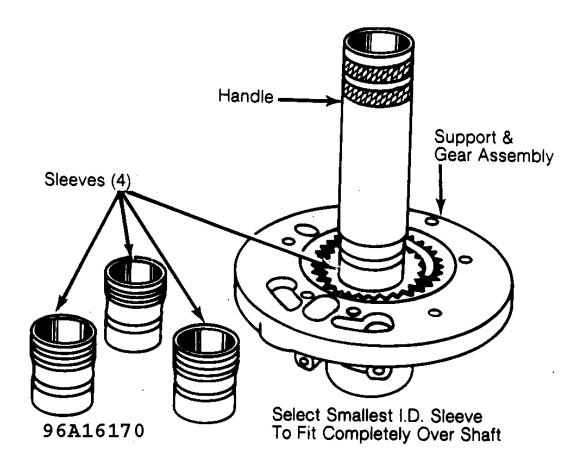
Front Pump Alignment Set Courtesy of FORD MOTOR CO.
